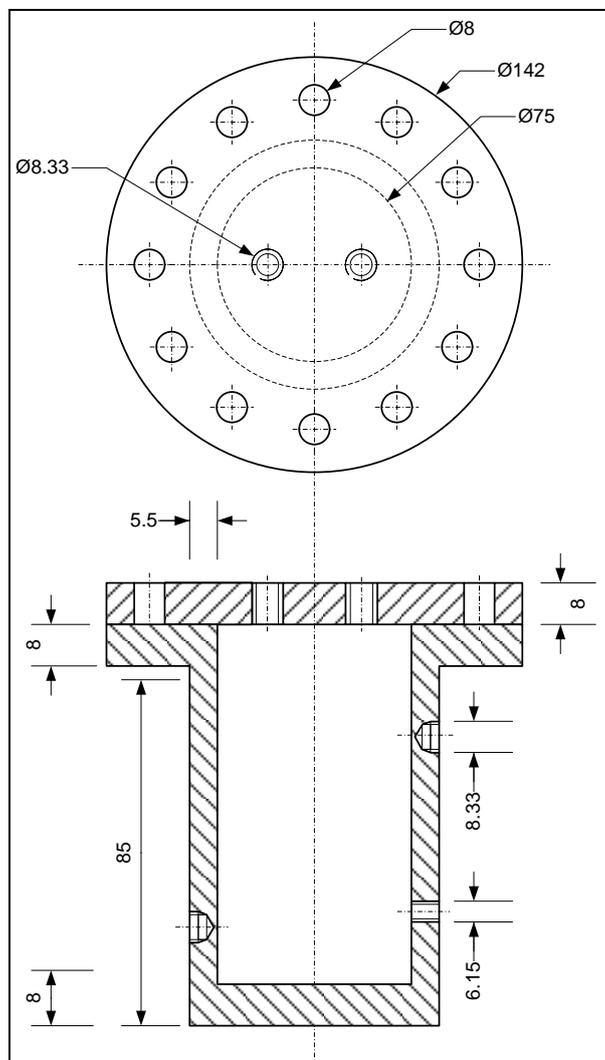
2: Schematic of the equilibrium cell (dimensions in millimetres).
